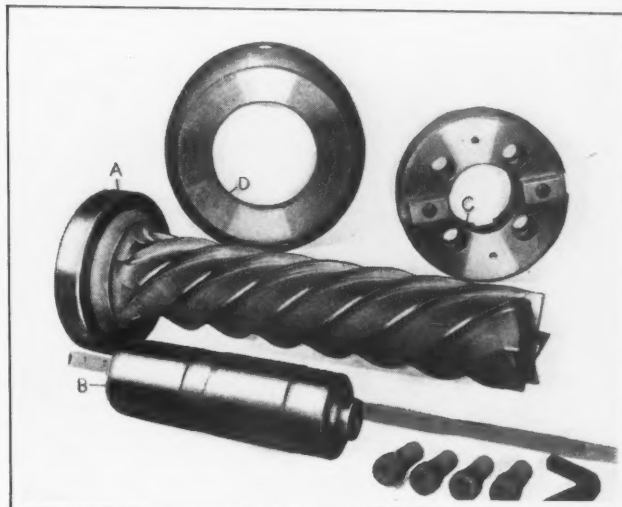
Disassembled Details of the Long Helical Milling Cutter Illustrated in Fig. 5
